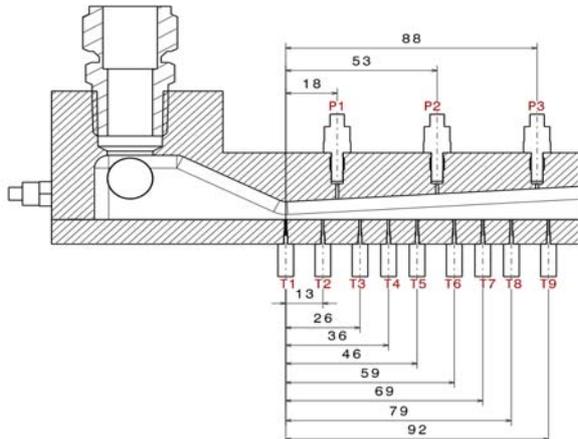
Indication of location of thermocouples and pressure sensors in the expanding nozzle area
